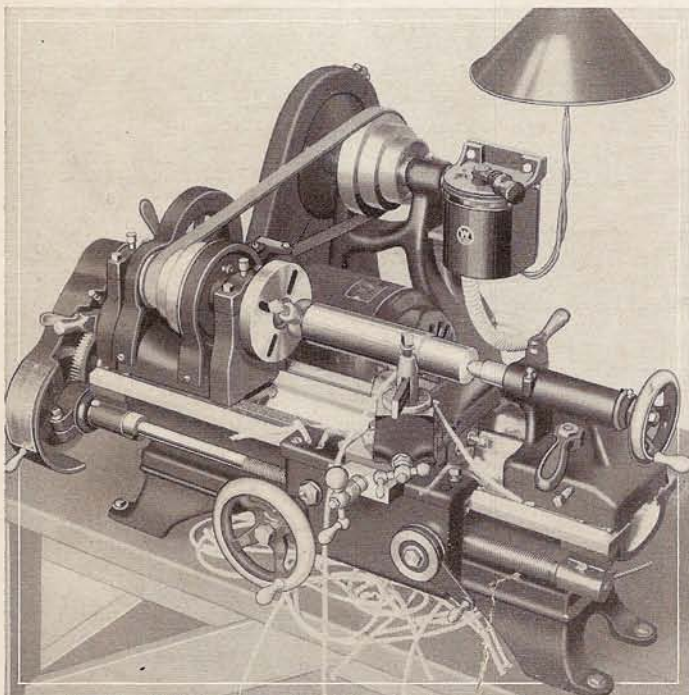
Self Contained Unit Motor Drive Junior Bench Lathe
